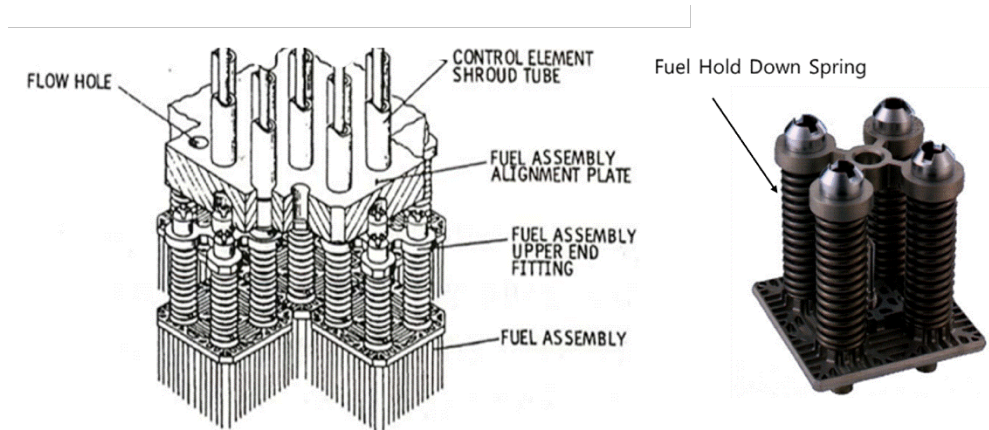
Design of CEA Guide Tube to Fuel Assembly
